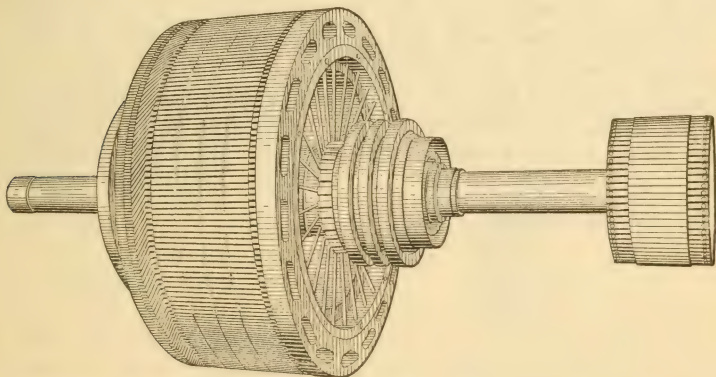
SYNCHRONOUS MOTOR ROTOR WITH STARTING ARMATURE.
